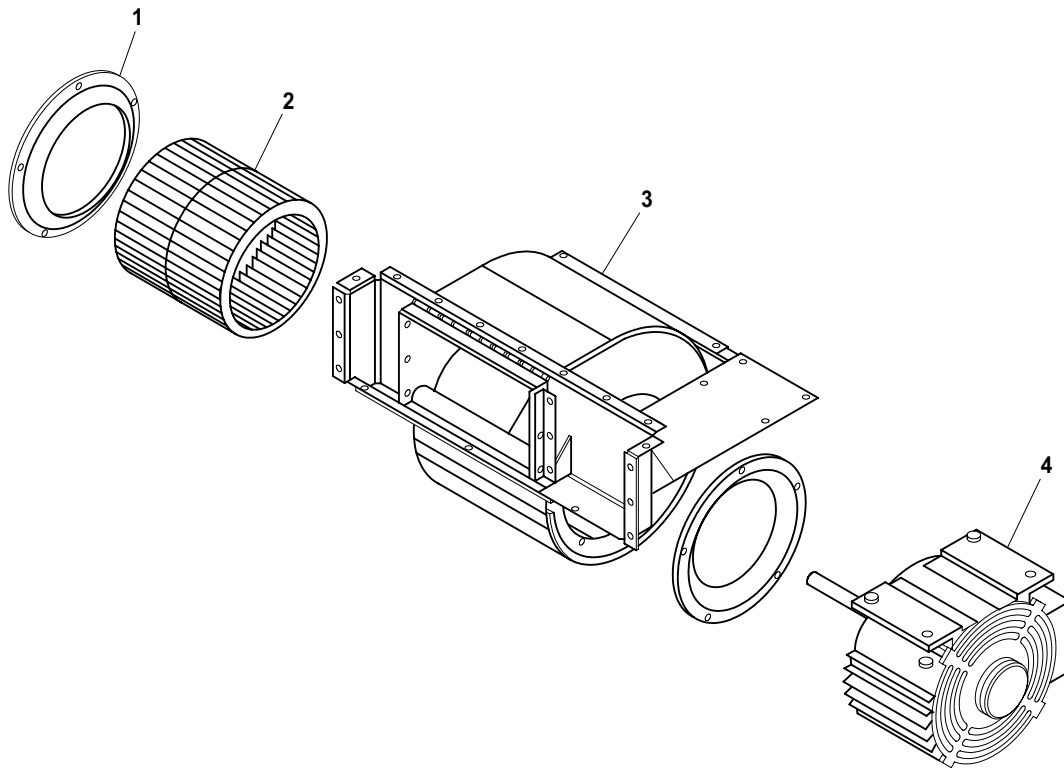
CONDENSER BLOWER AND MOTOR ASSEMBLY.
